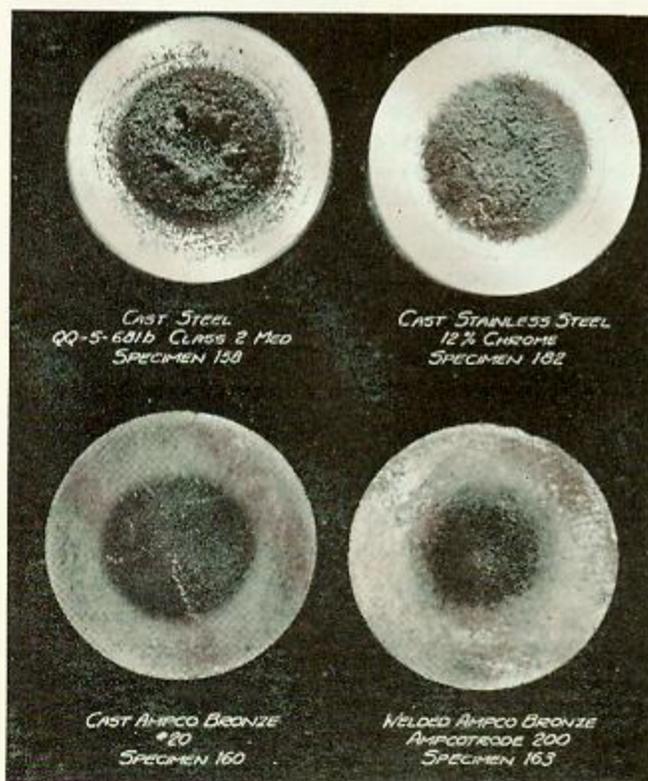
Photograph of cast and welded Ampoc bronze.
